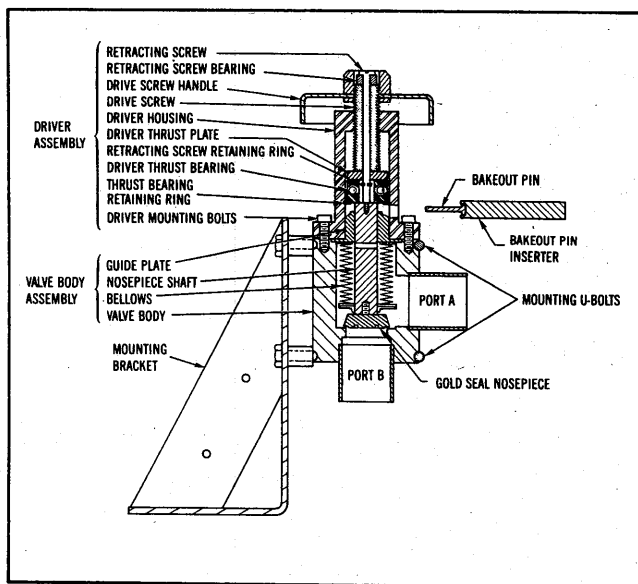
Sectional View of Series 204, 1 Inch Gold Seal Valve
